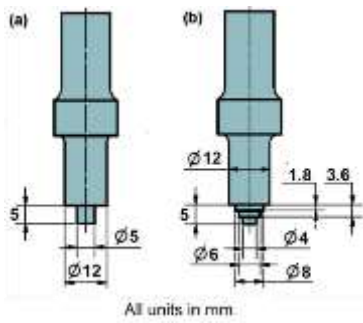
FSSW tools type:(a) Cylindrical pin (b) Step pin
